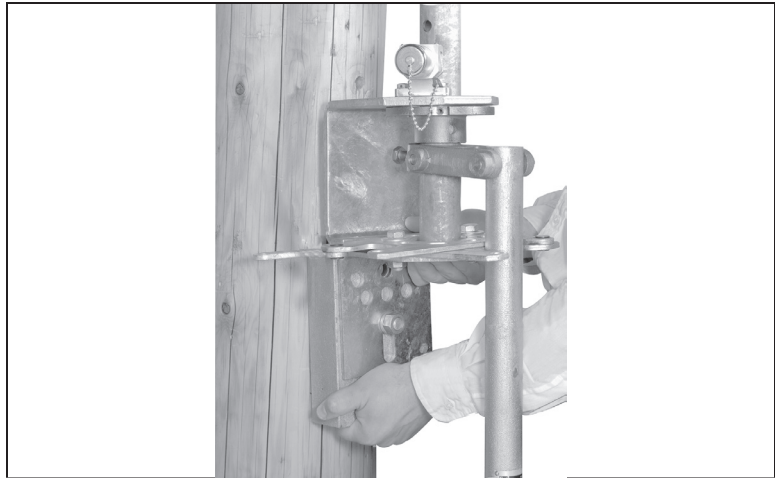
Position the interlock bracket, locking disc, operating handle assembly, and foot-bearing assembly onto the lowest vertical operating-pipe section.
